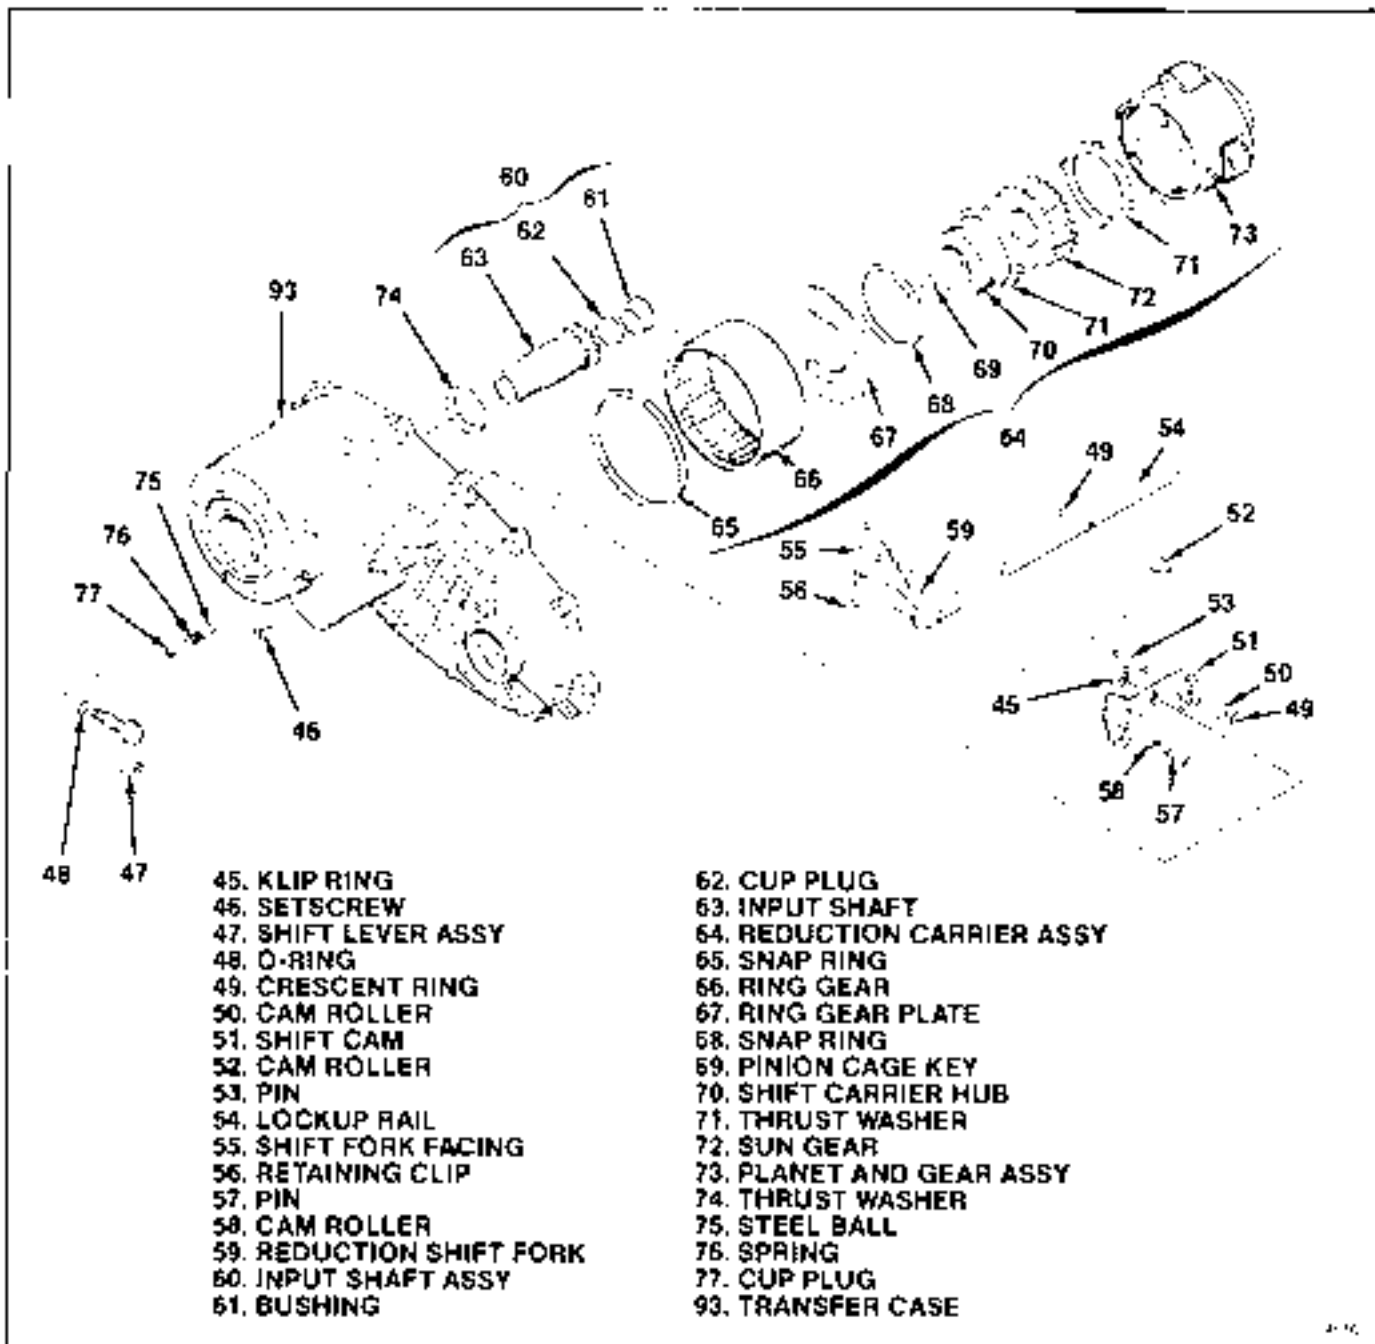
Reduction Shift, Carrier and Input Shaft Parts
